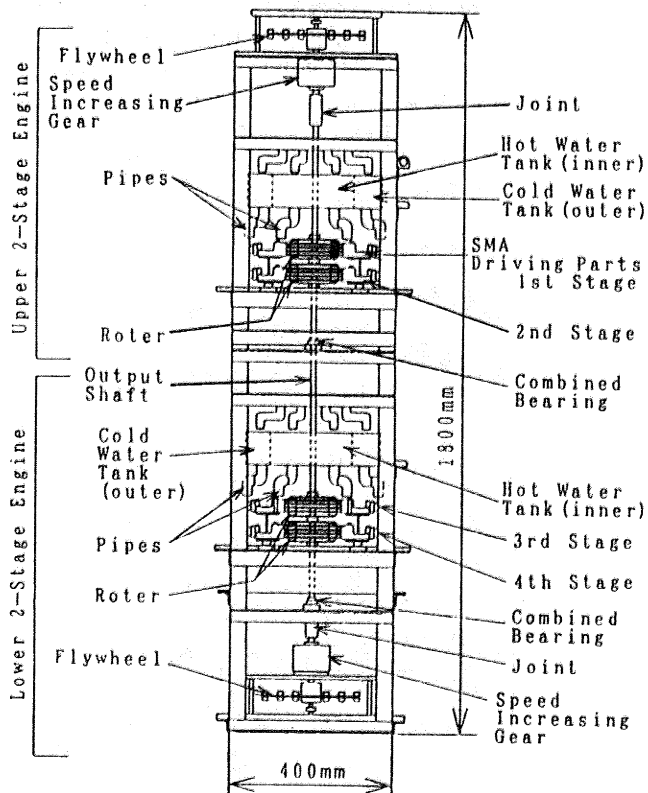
4-Stage Type SMA Heat Engine (Front View)
